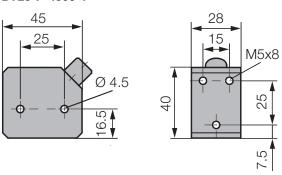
Installation dimensions of BTL5-P-4500-1 magnet
